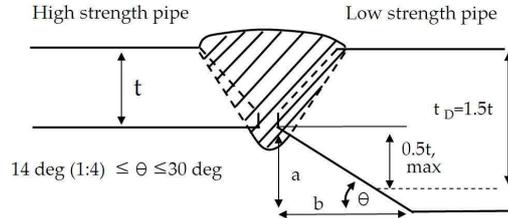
Weld joint of pipe with unequal wall thickness
